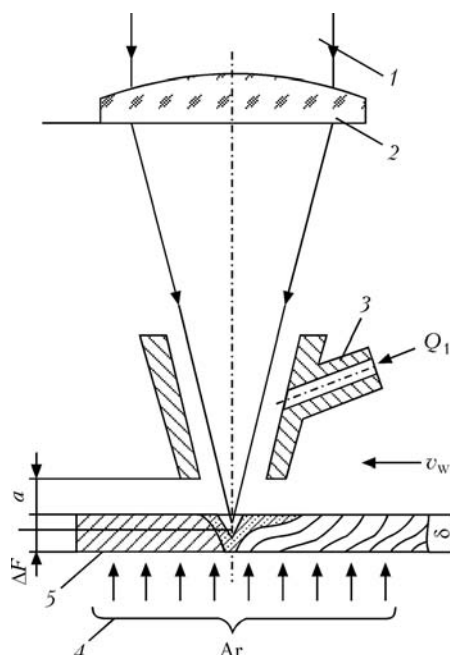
Scheme of laser welding with coaxial feed of shielding gas: 1 – laser radiation; 2 – focusing lens; 3 – nozzle for feed of shielding gas; 4 – shielding of weld root; 5 – workpiece
